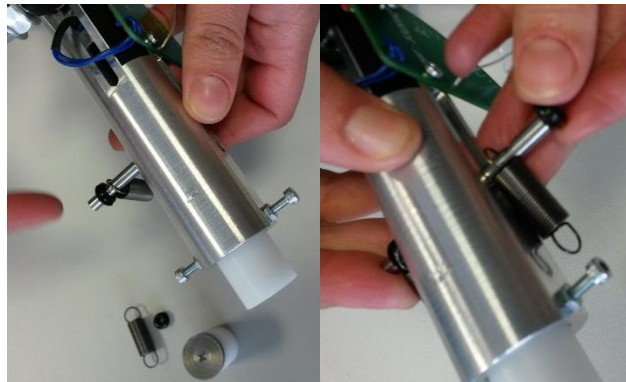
Through the side openings in the launcher, insert the spring-holding pin passing through the orifice in the accessory. Refit the rubber caps.
